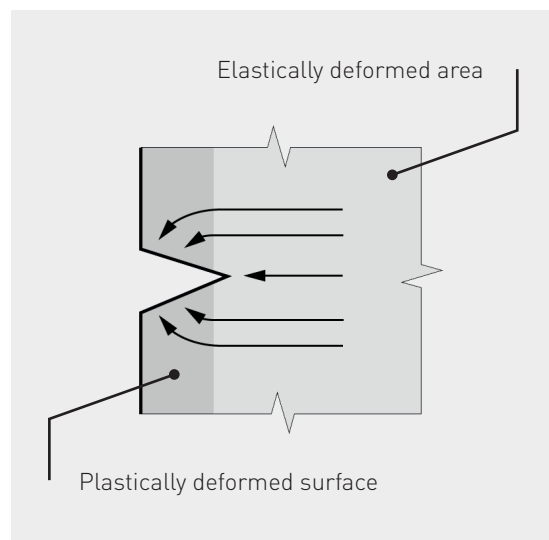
Mechanism of closing the fatigue crack due to the compressive relaxation forces
